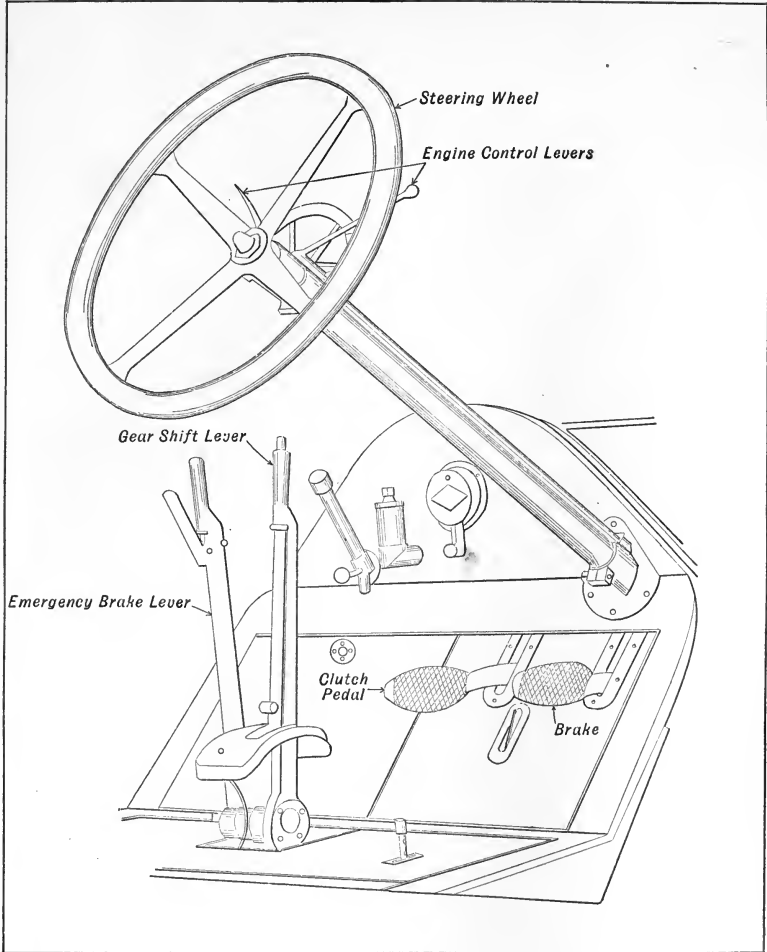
Complete Control Group of Mitchell Motor Cars.
